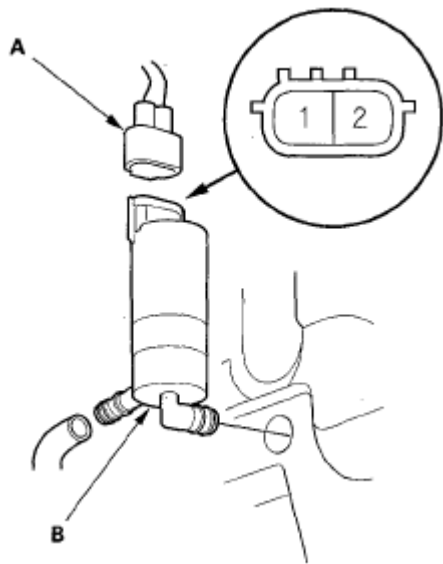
Identifying Headlight Washer Motor And 2P Connector
